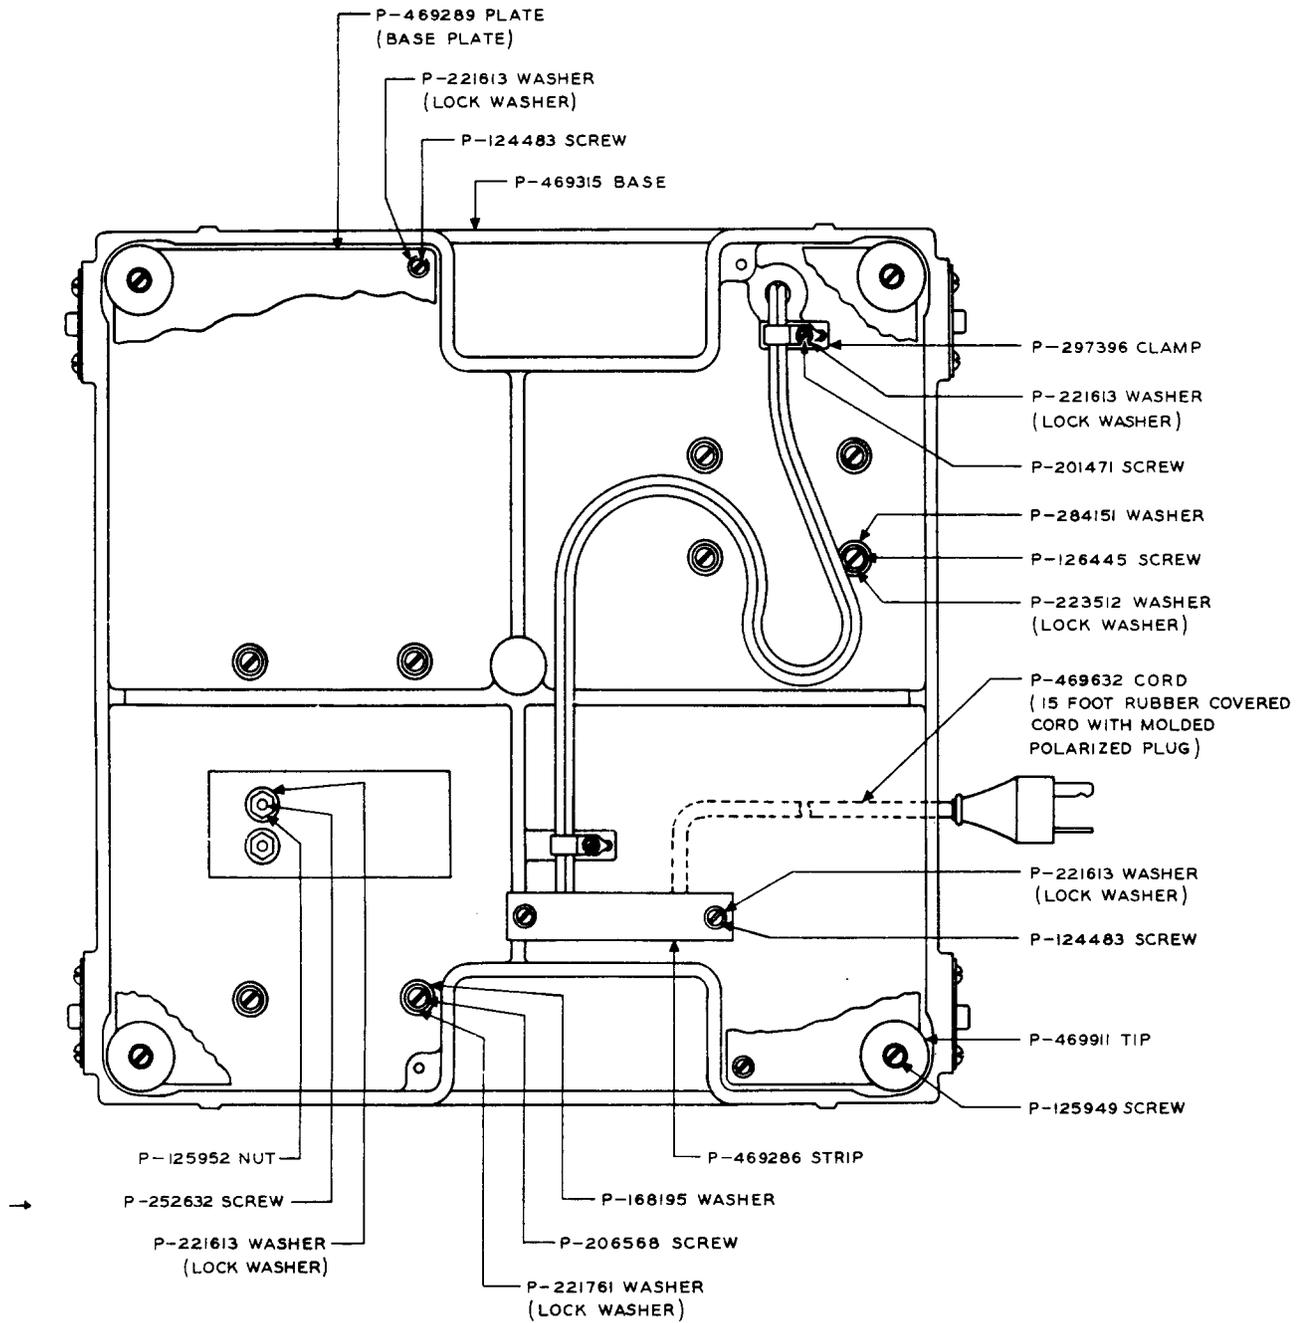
Base, Motor, and Cleaner Housing Mounting Screws and Associated Parts
